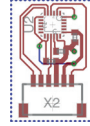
Sensor Board PCB Layout. 1:1 scale image of PCB layout for a single sensor board.
